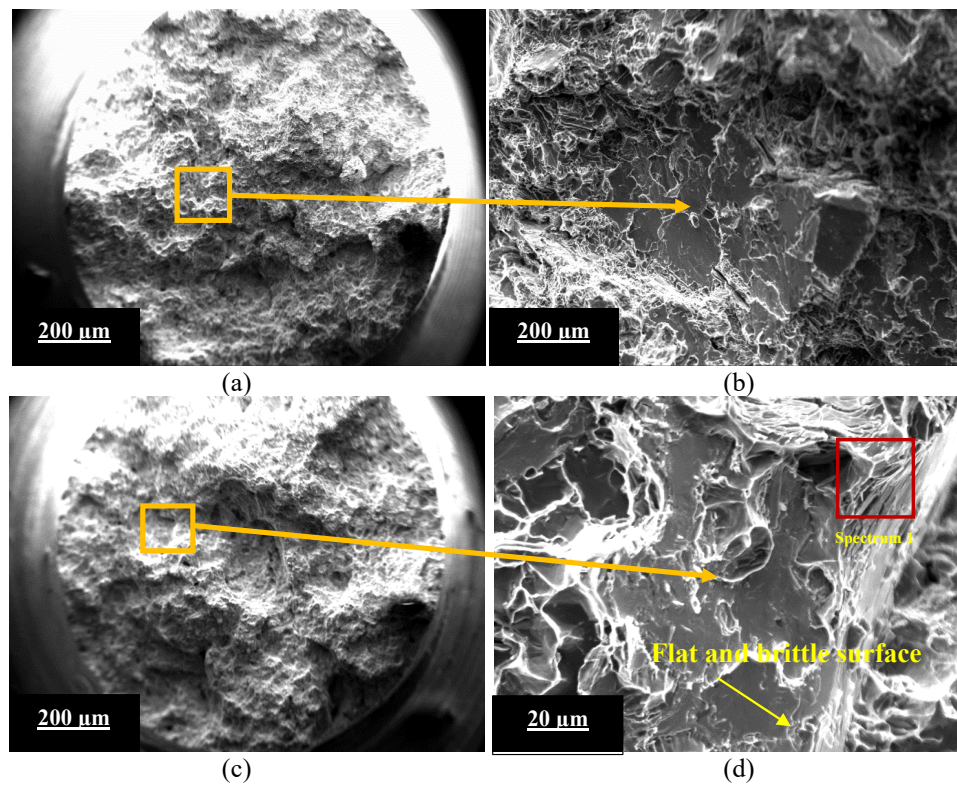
(a),(b) Fracture surface of as-cast LM4, and (c),(d) fracture surface of peak aged (MSHT + aged at 100°C) LM4
